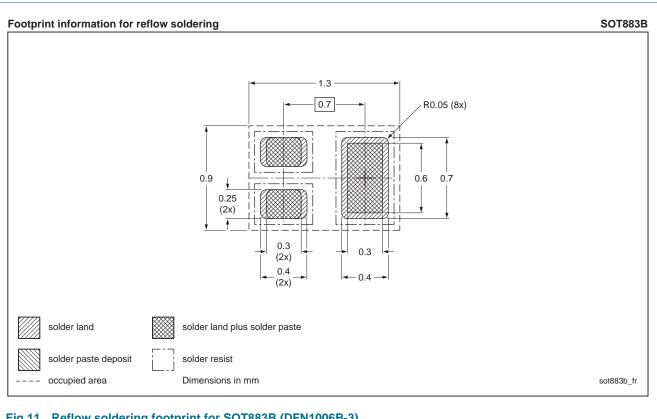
Reflow soldering footprint for SOT883B (DFN1006B-3)
